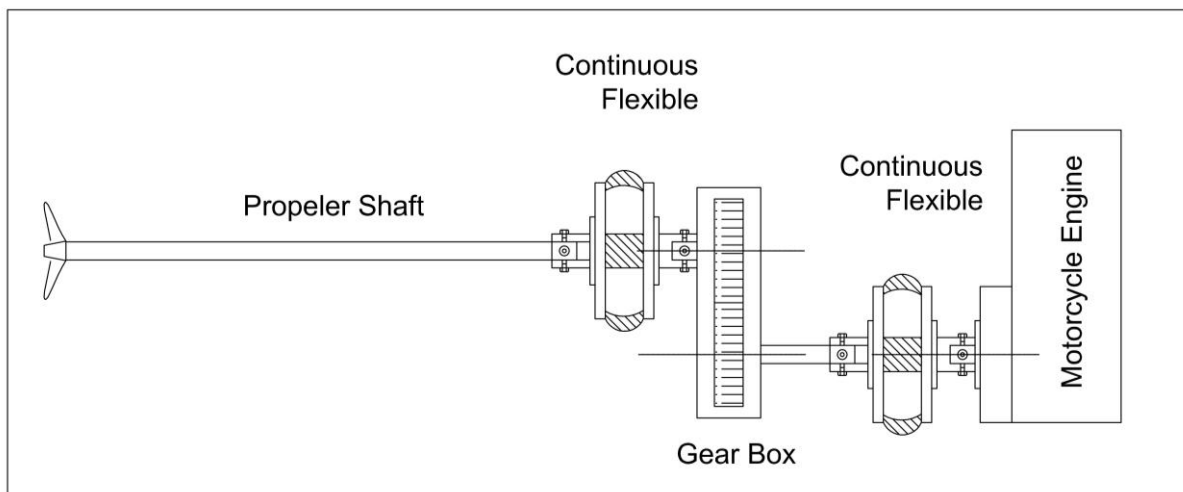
Setting the motor engine as catamaran motor boat driving force.
